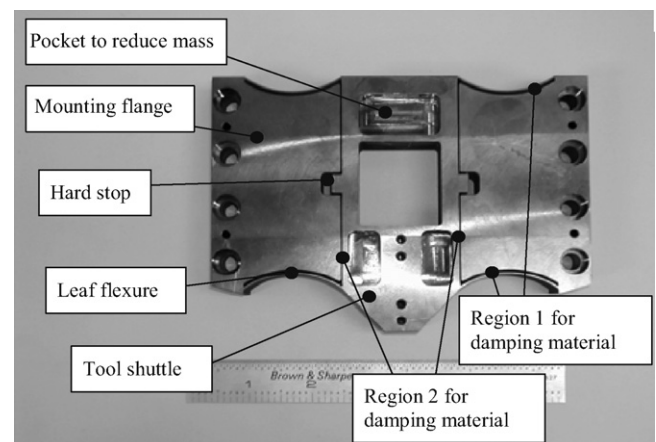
Flexure mechanism that carries the cutting tool. Extra damping material can be applied between stationary and moving parts.
